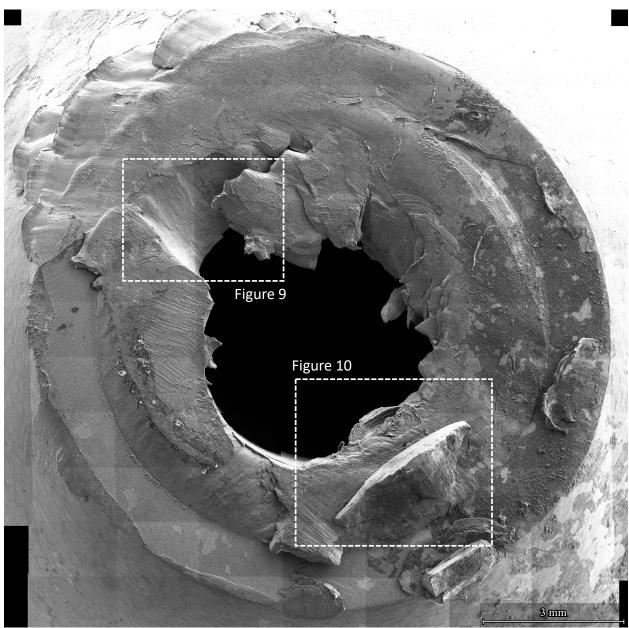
Scanning electron microscope image of the bearing shaft fracture surface from the Station 3 portion of tilt slde anti sag roller bearing mount.
